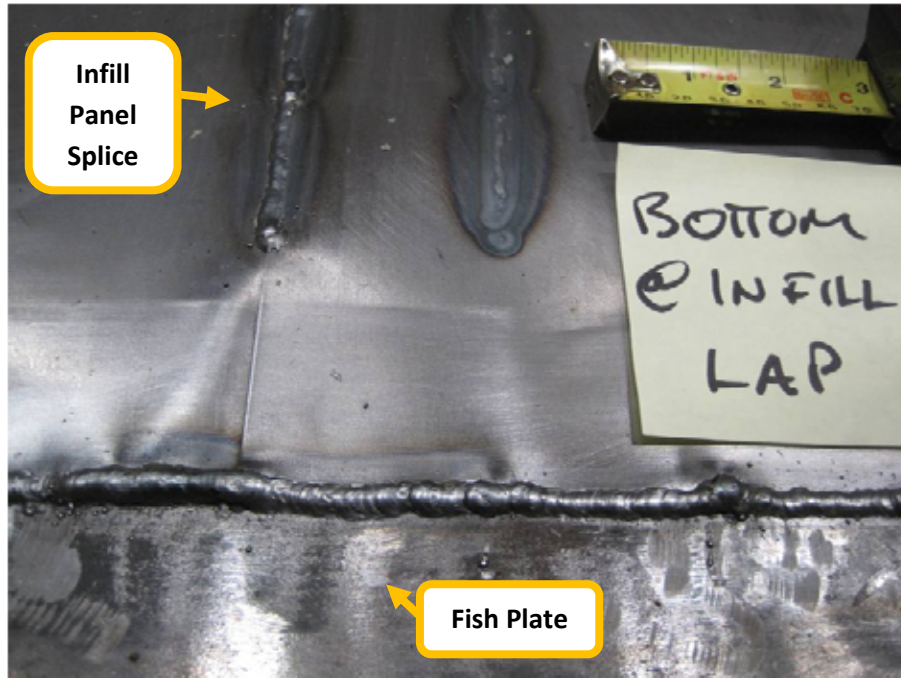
Pitting in Infill Panel-to-Fish Plate Weld Left of the Bottom of the Infill Panel Lap Splice
